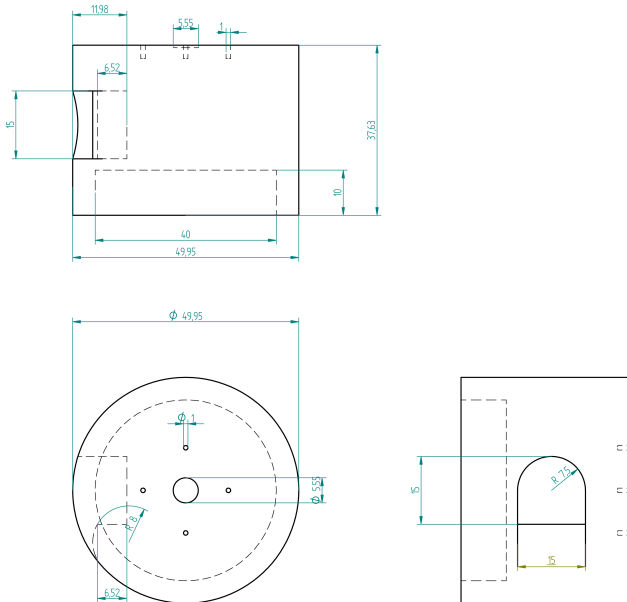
This technical drawing illustrates the casing. The dotted lines on the right hand side of the the upper image are there to help fabrication on a CNC machine. That is, they tell you the dimensions and the angle for milling the hole, which lets the Cocoa Pops dropping out out of the device.
